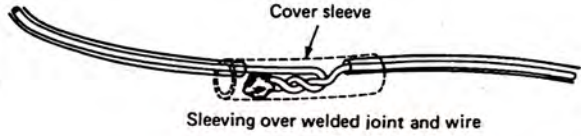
(b) Welded joint with sleeving of insulation.
